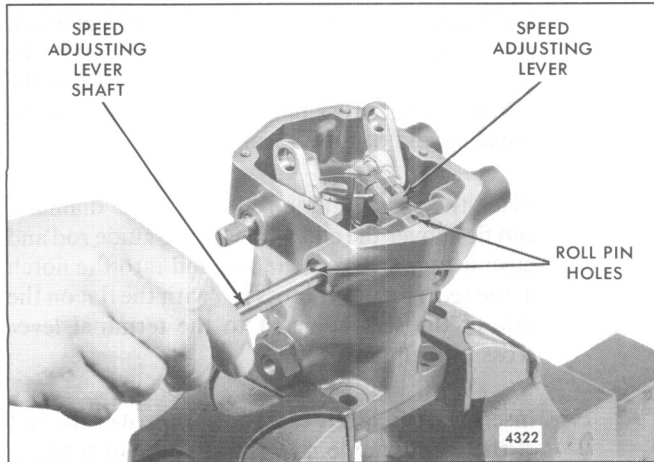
Installing Speed Adjusting Lever Shaft in Governor Housing and Adjusting Lever
